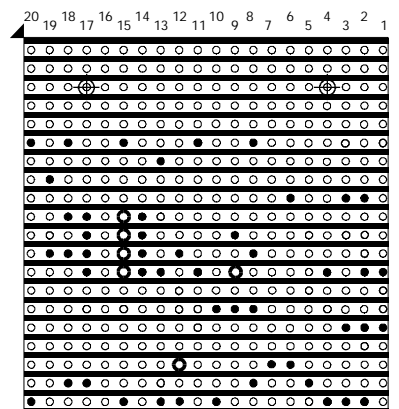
Stripboard component layout, inter-wiring to off-board components and details of breaks required in the underside copper strips.
